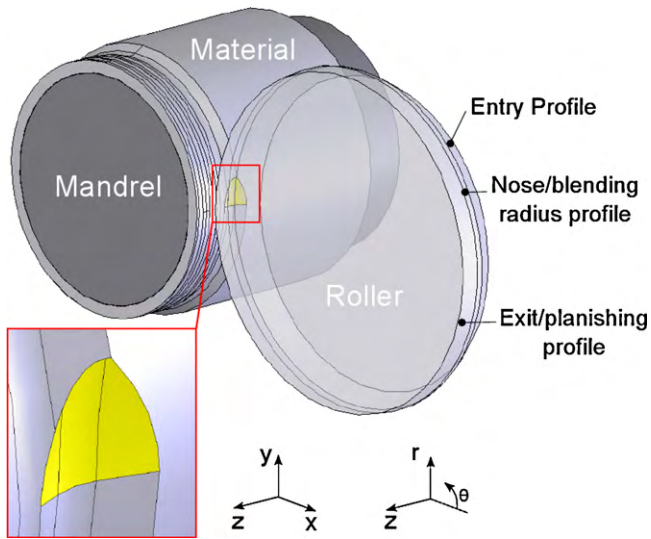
Single roller contact in flow forming showing the mandrel and key roller profiles.
